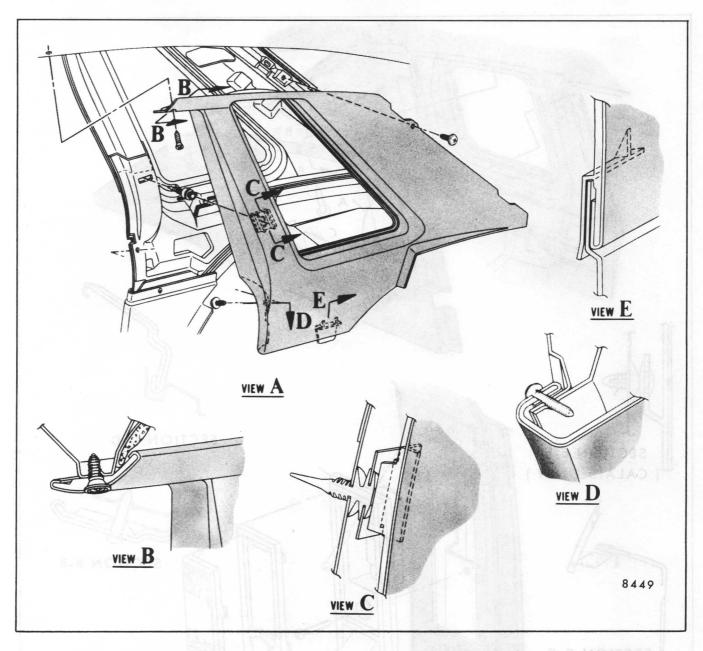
Quarter Upper Trim Attachment (4-Door Style)
